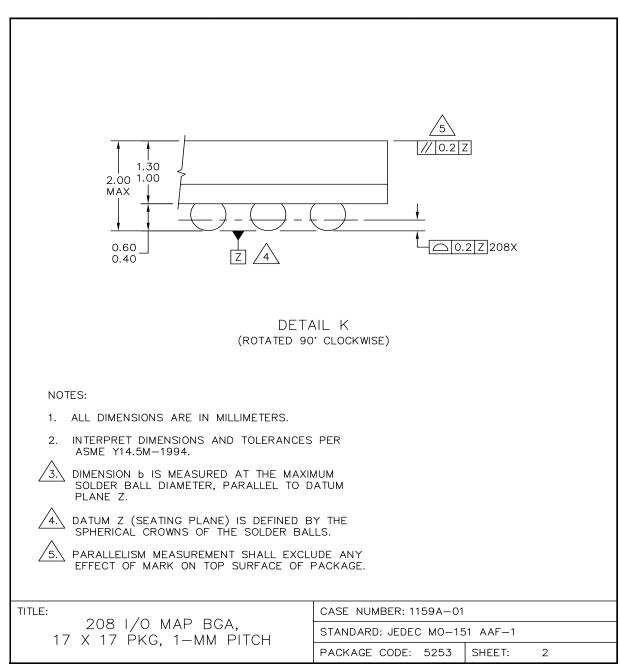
208 MAPBGA package mechanical drawing (part 2)
